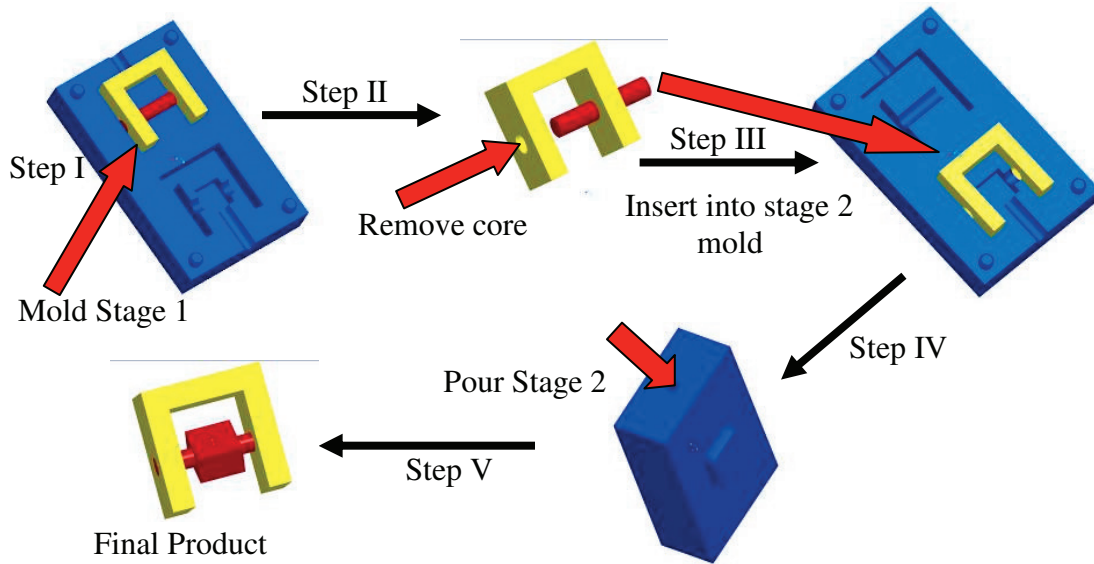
Steps for in-mold assembly of a macroscale revolute joint
